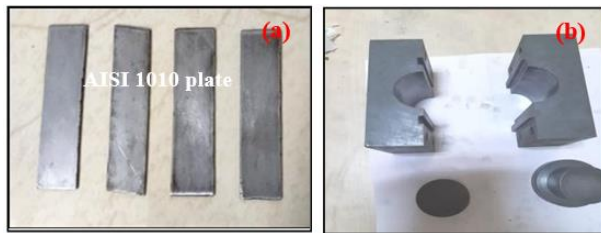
(a) Mild Steel Sample, (b) Split-up pellet die
